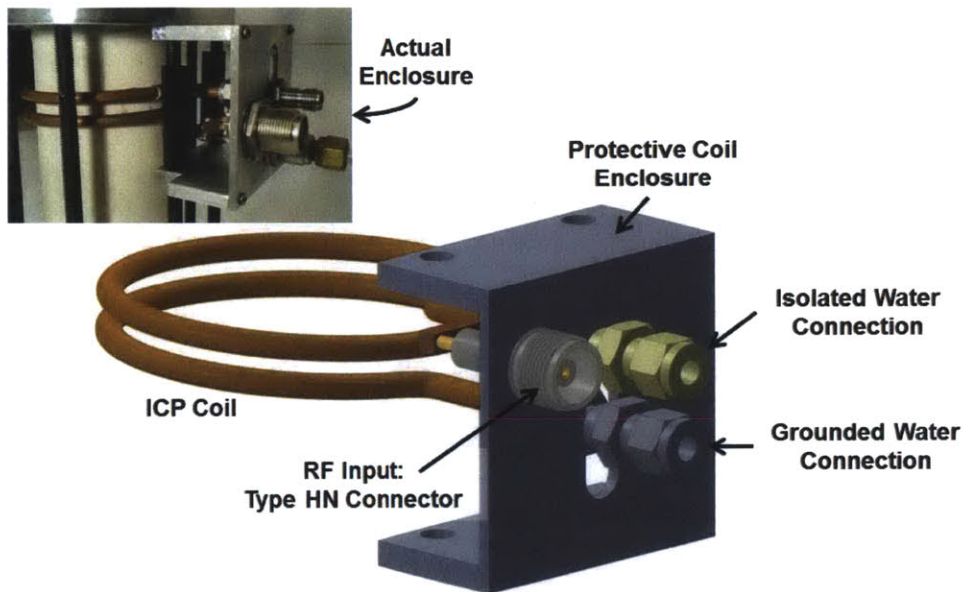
The coil assembly rendering shown with the mounting bracket. The actual coil assembly used on the etcher is shown in the upper left of the figure.
